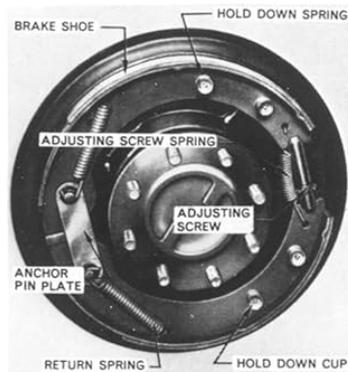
View of brake assembly for Models 2310, 2600, 2610, 3600 and 3610 with wheel and brake drum removed. Refer to Fig. 213 for exploded view.
